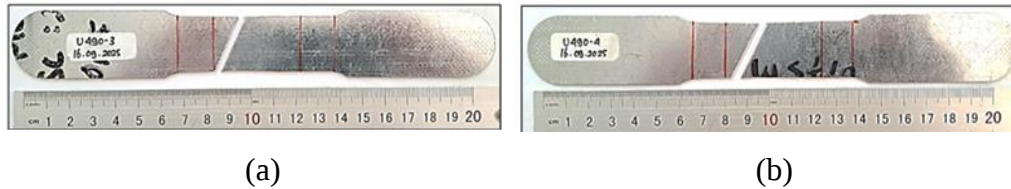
Tensile test sample with a thickness 0.45 mm conducted in manufacturer laboratory (a) and an independent laboratory, show broken at outside gauge length (b).
